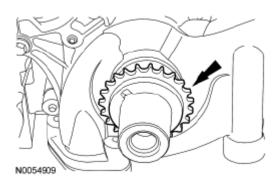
Locating Crankshaft Timing Chain Sprocket Courtesy of FORD MOTOR CO.
